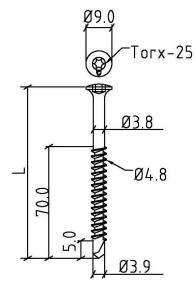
BSHD 4.8 Screw for fixing in steel sheets (steel thickness from 1,0mm up to maximum 3,0mm)
